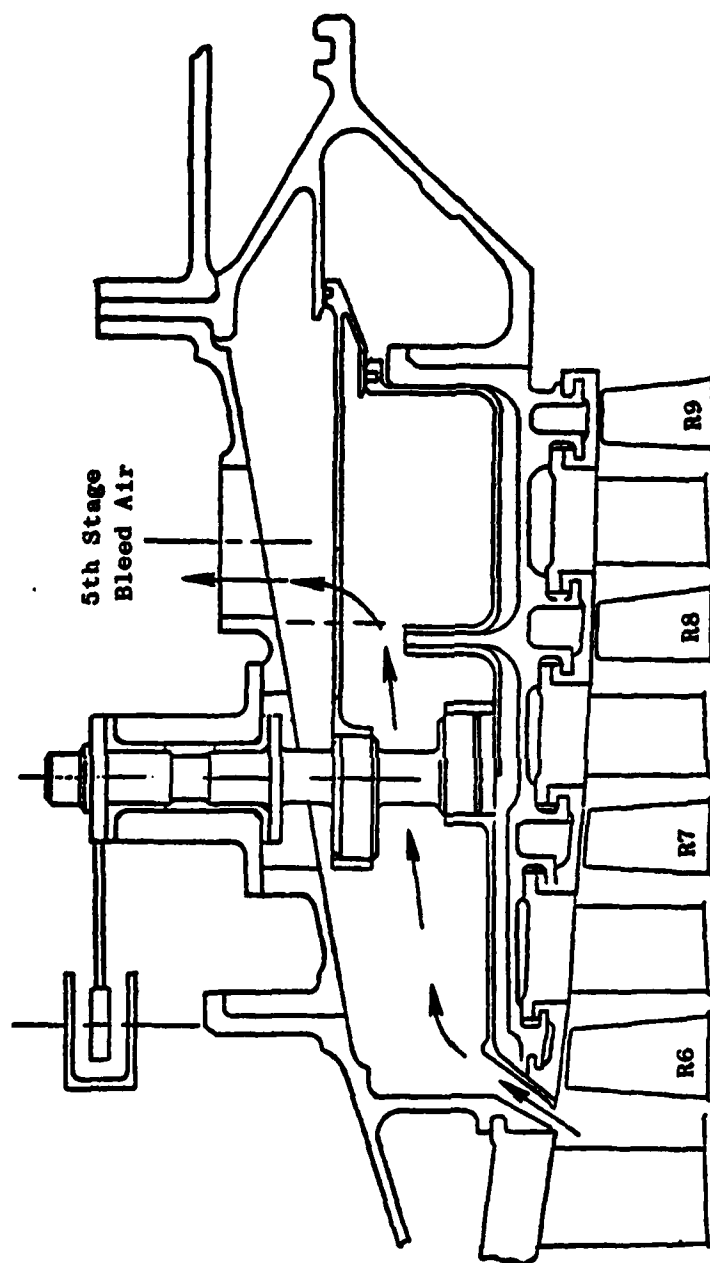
F101/CFM56 Compressor Clearance Control Mechanical System
